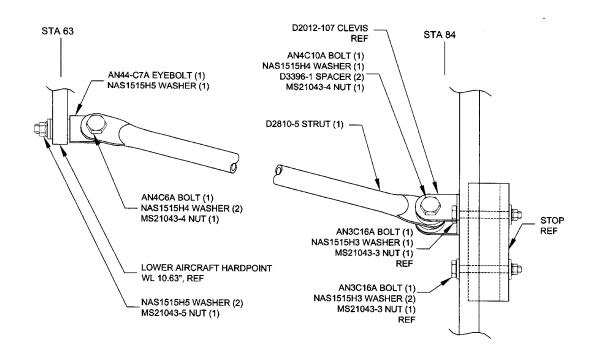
Strut Detail for D412-630-033/-034 Heli-Access-Step[™] Installation (NOT TO SCALE)
